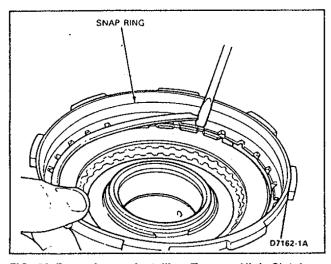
Removing or Installing Reverse-High Clutch Pressure Plate Snap Ring
